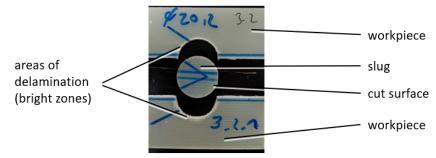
Slug and divided workpiece prepared for measurements and visual inspection
